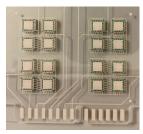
uncleaned QFN with different solder mask design [2] Non Solder Mask has better values of SIR
